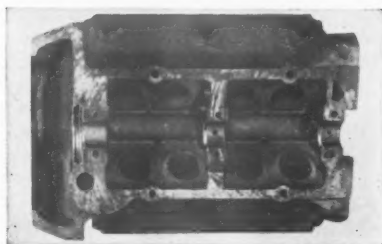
Cylinder block in which bearings and oil-retainer groove are Rigidmilled.
